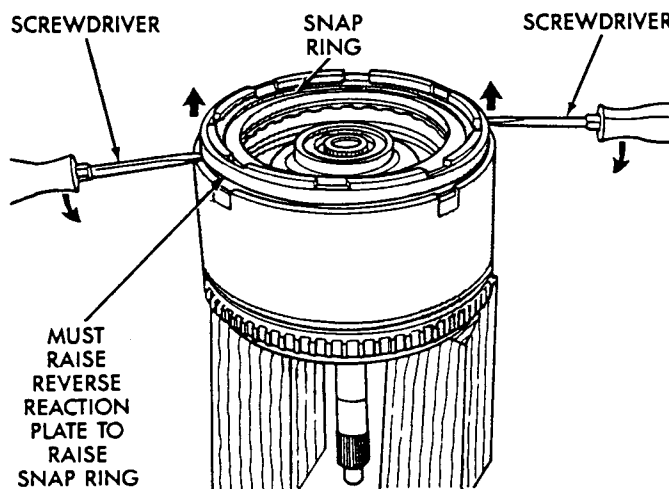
Seating Snap Ring to Determine Reverse Clutch Clearance
